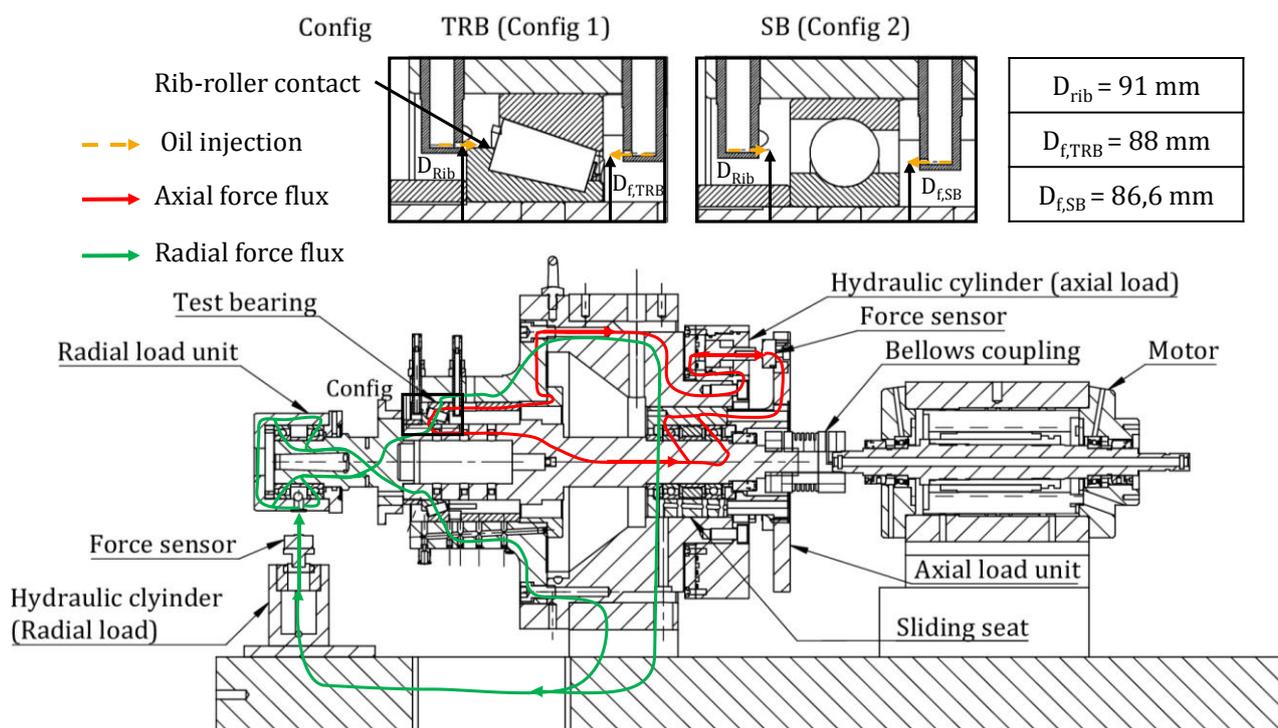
Cross section of test rig, force flux, the bearing configurations and the lubrication injection diameters.
